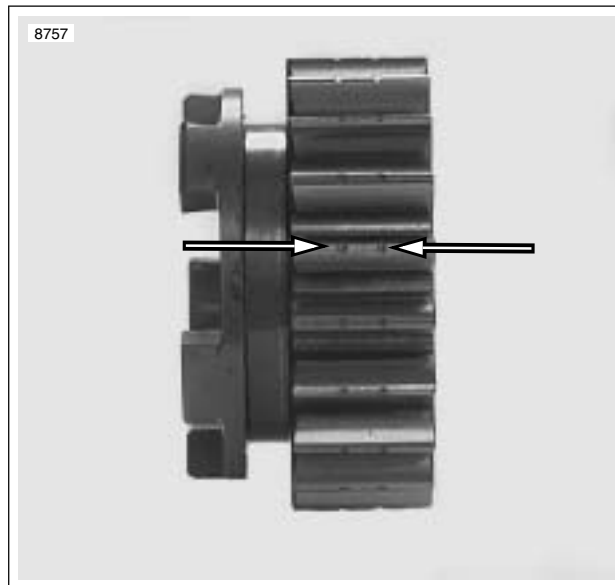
New Mainshaft 1st Gear with Identification Grooves
